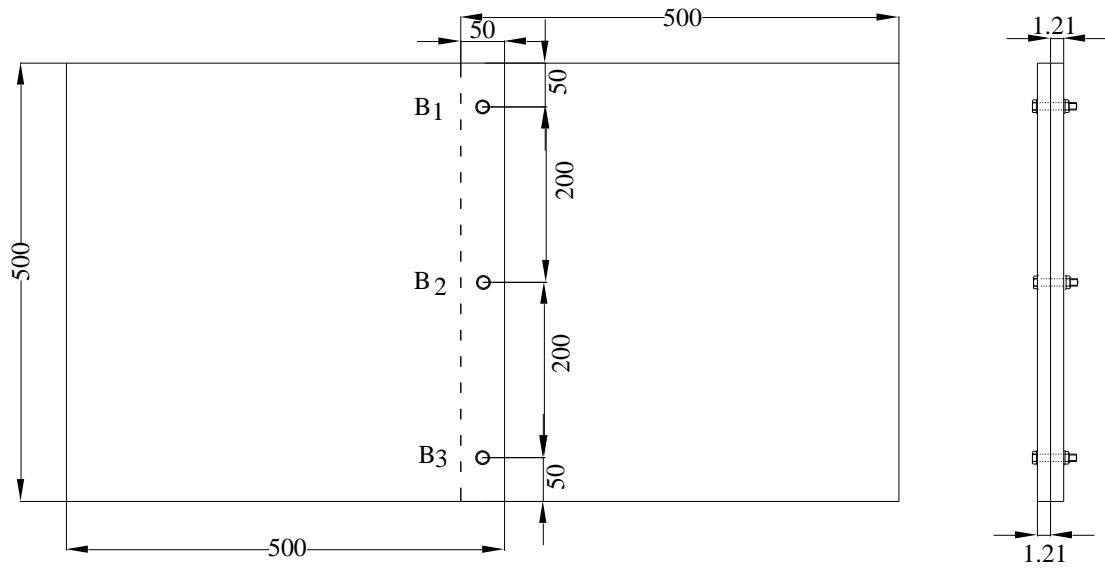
Geometric dimensions of plates with bolted lap joint (Case-1)
